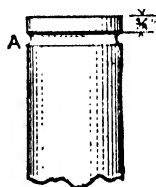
Appearance of a Round Pipe After Passing through the Turning Machine
